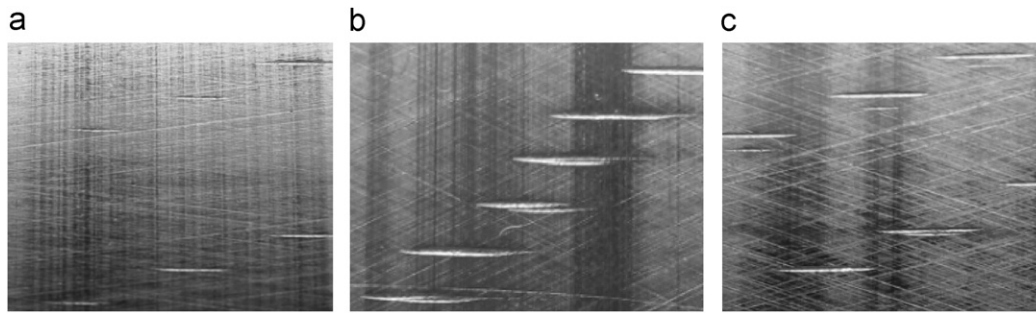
Photos of surfaces with burnished oil pockets: (a) K1M, (b) K2B, (c) K3VB. Pictures were taken after the test.
